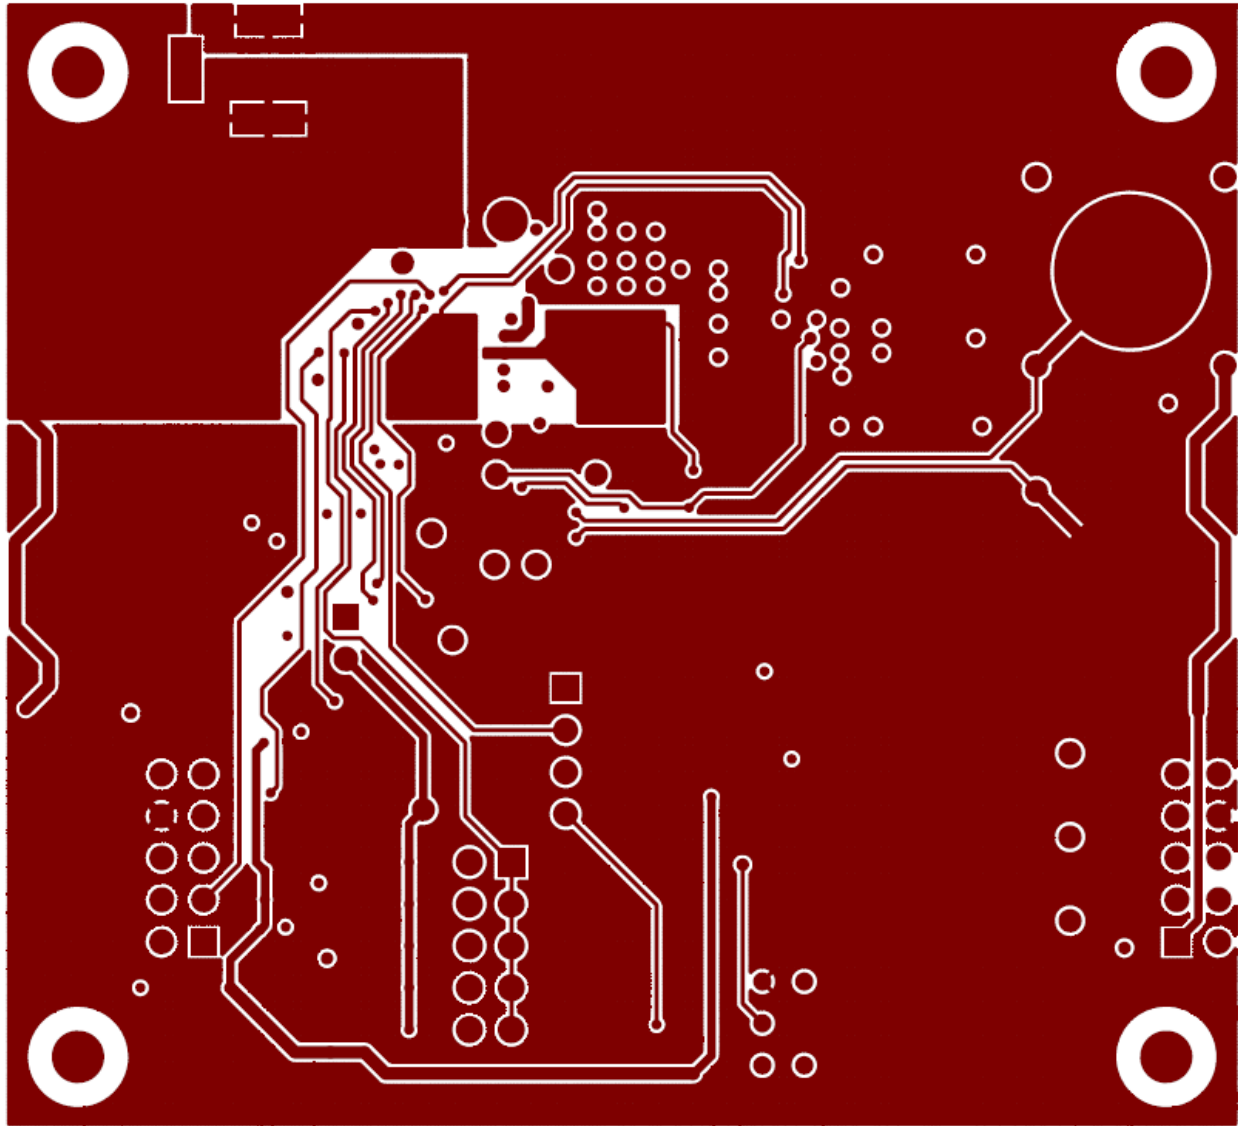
PCB – Inner Layer 2 (Viewed from Top)
